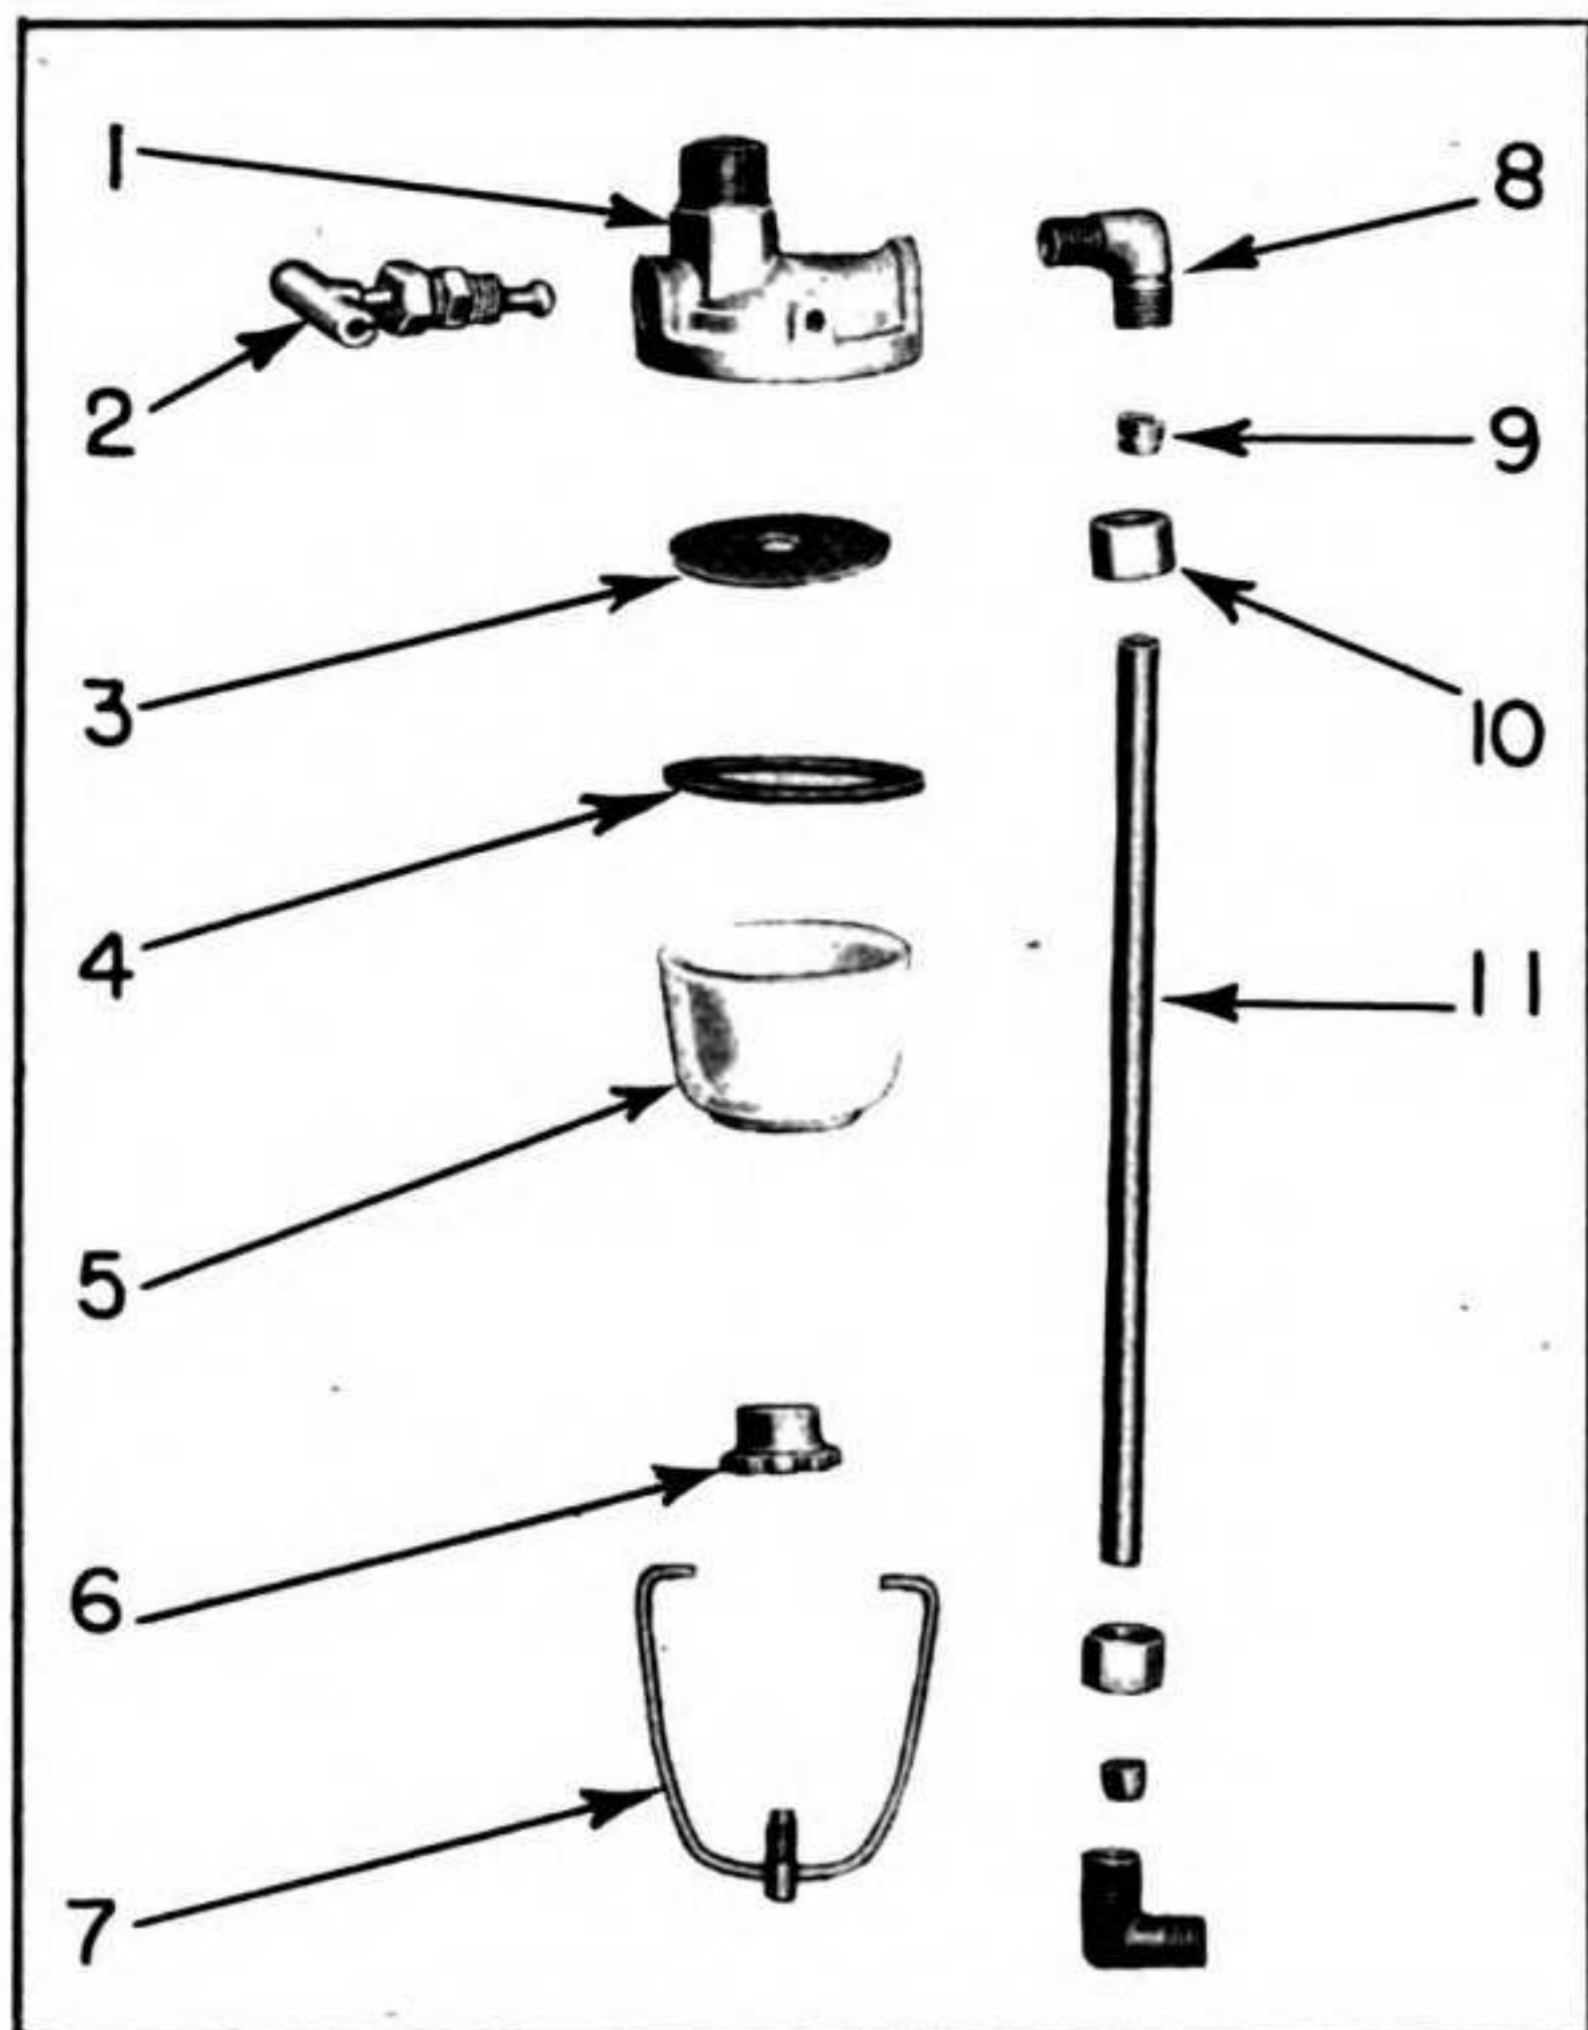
Fuel Strainer Bowl and Attaching Parts
